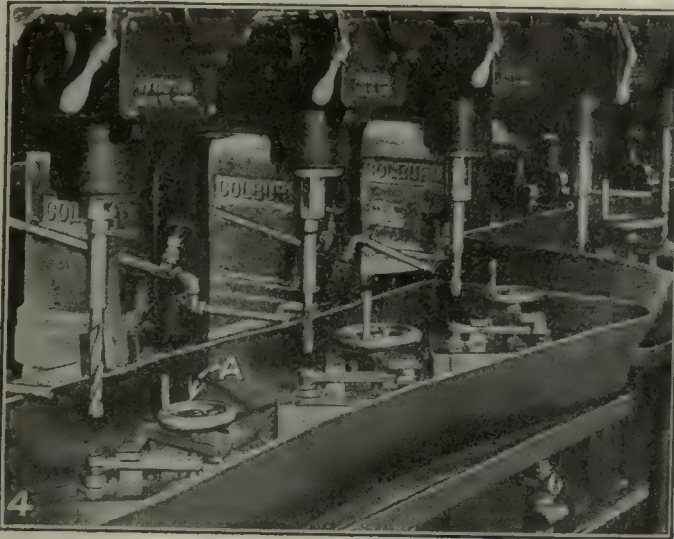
ROUGH-DRILLING PISTON-PIN HOLE
